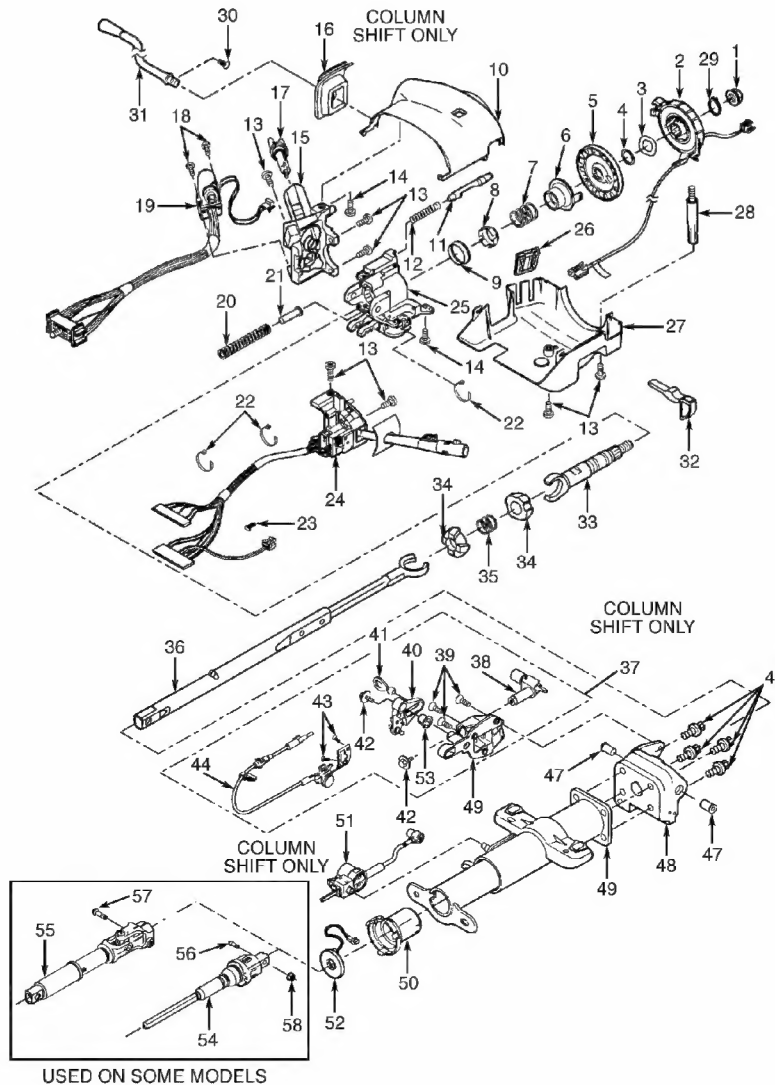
Exploded View Of Non-Tilt Steering Column ("C" & "K" Series Pickup Is Shown; All Others Are Similar)
